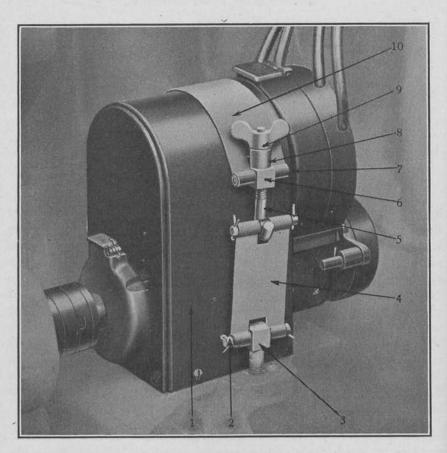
DETAILS OF MAGNETO AND MOUNTING
